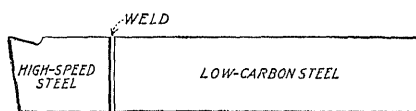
How the Parts Are Arranged for Welding.
